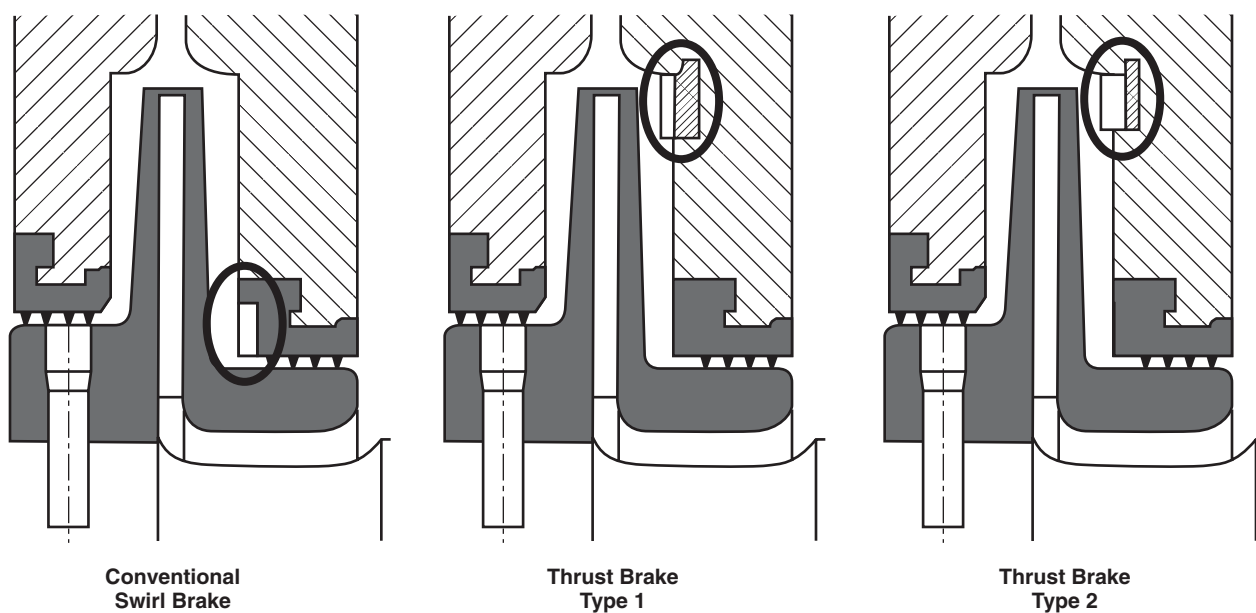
Swirl and Thrust Brakes Used in High-pressure Compressors [27]
